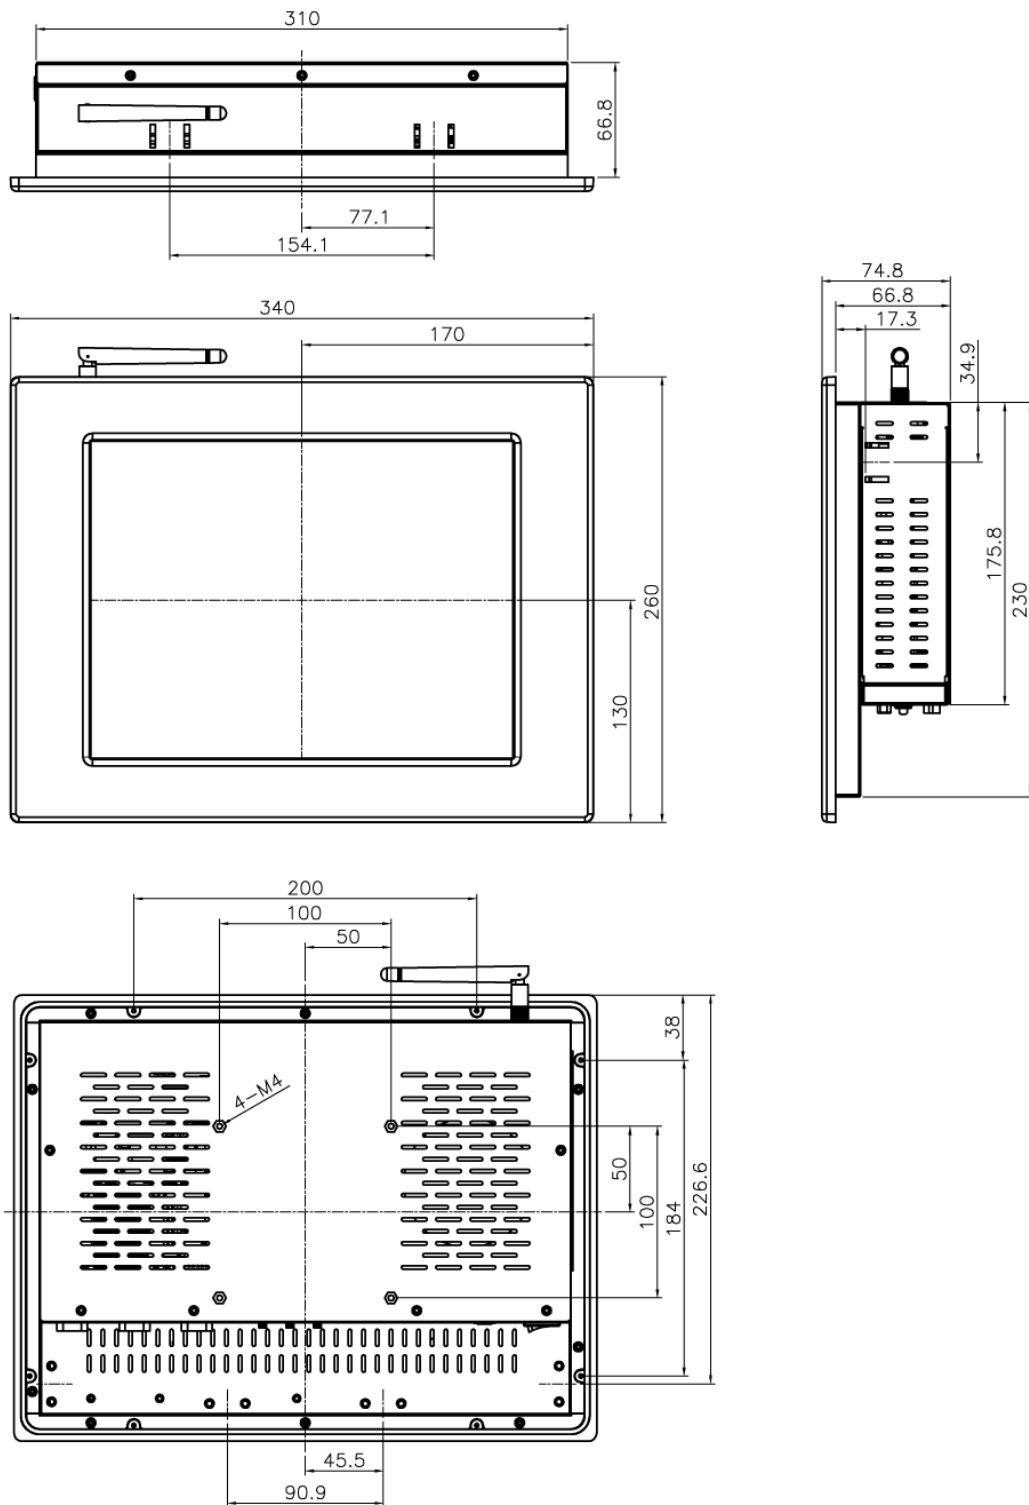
PPC-3712A-N26 Dimensions (mm)
